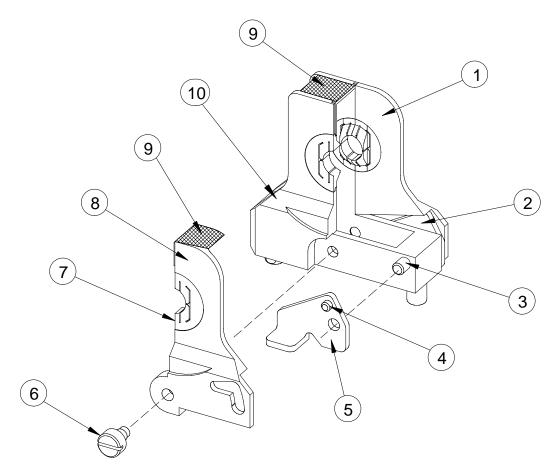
CWS-4MF- Micro Weld Head Fixture
